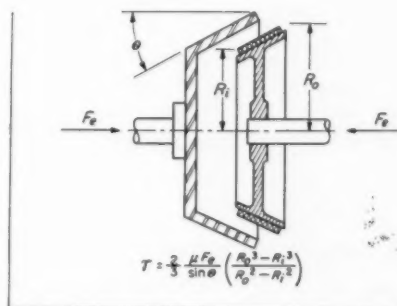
Above, right—Basic design and torque relationships for the cone type friction mechanism
